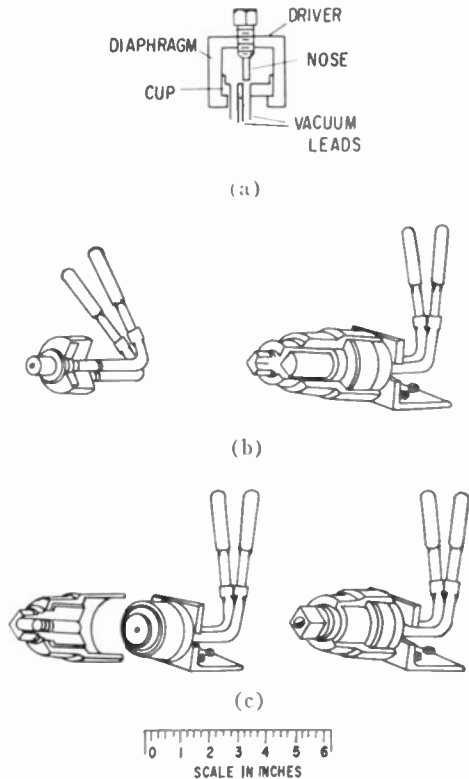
Ultra-high vacuum bakeable metal valve (Alpert). (a) Schematic diagram. (b) Tube with differential screw-driving mechanism. (c) Tube with simple screw-driving mechanism.
